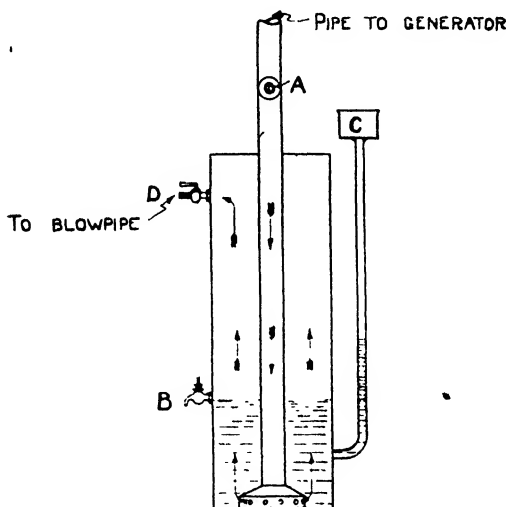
ACETYLENE GAS PASSING THROUGH HYDRAULIC BACK PRESSURE VALVE
